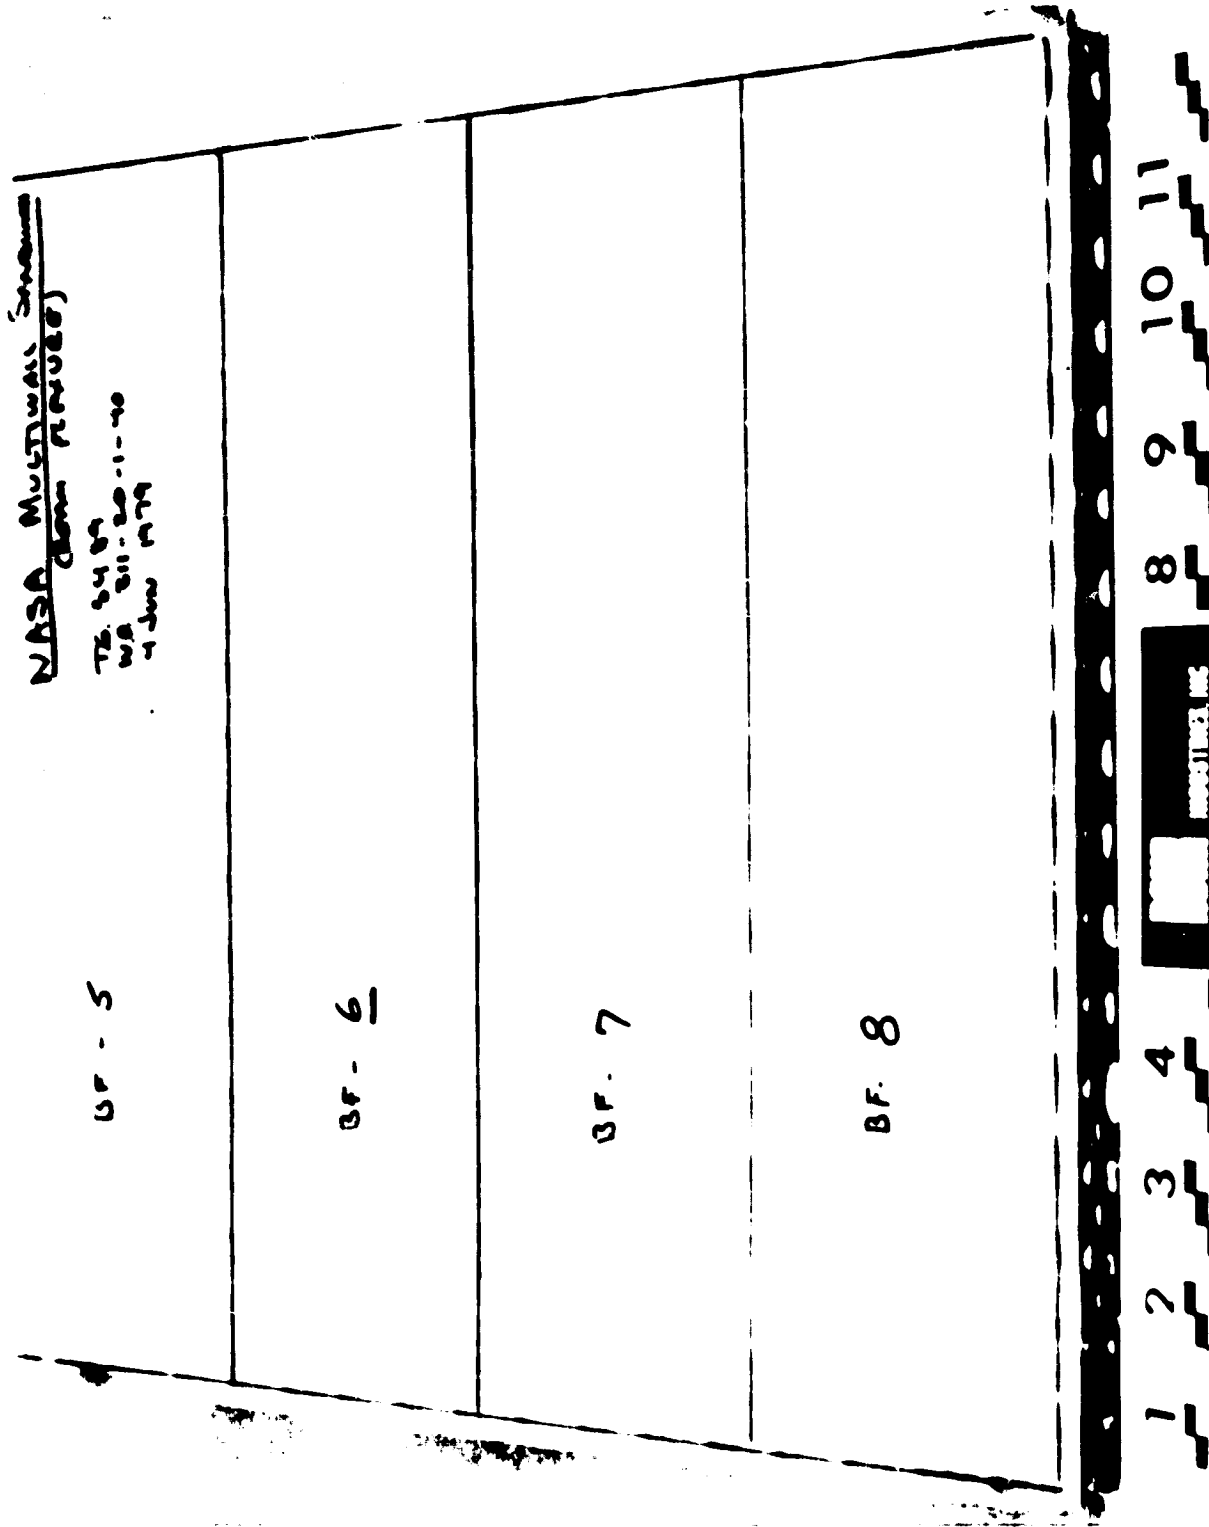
Flatwise Tension Test Specimen Layout for Cutting Beam Flexure Test Specimens
